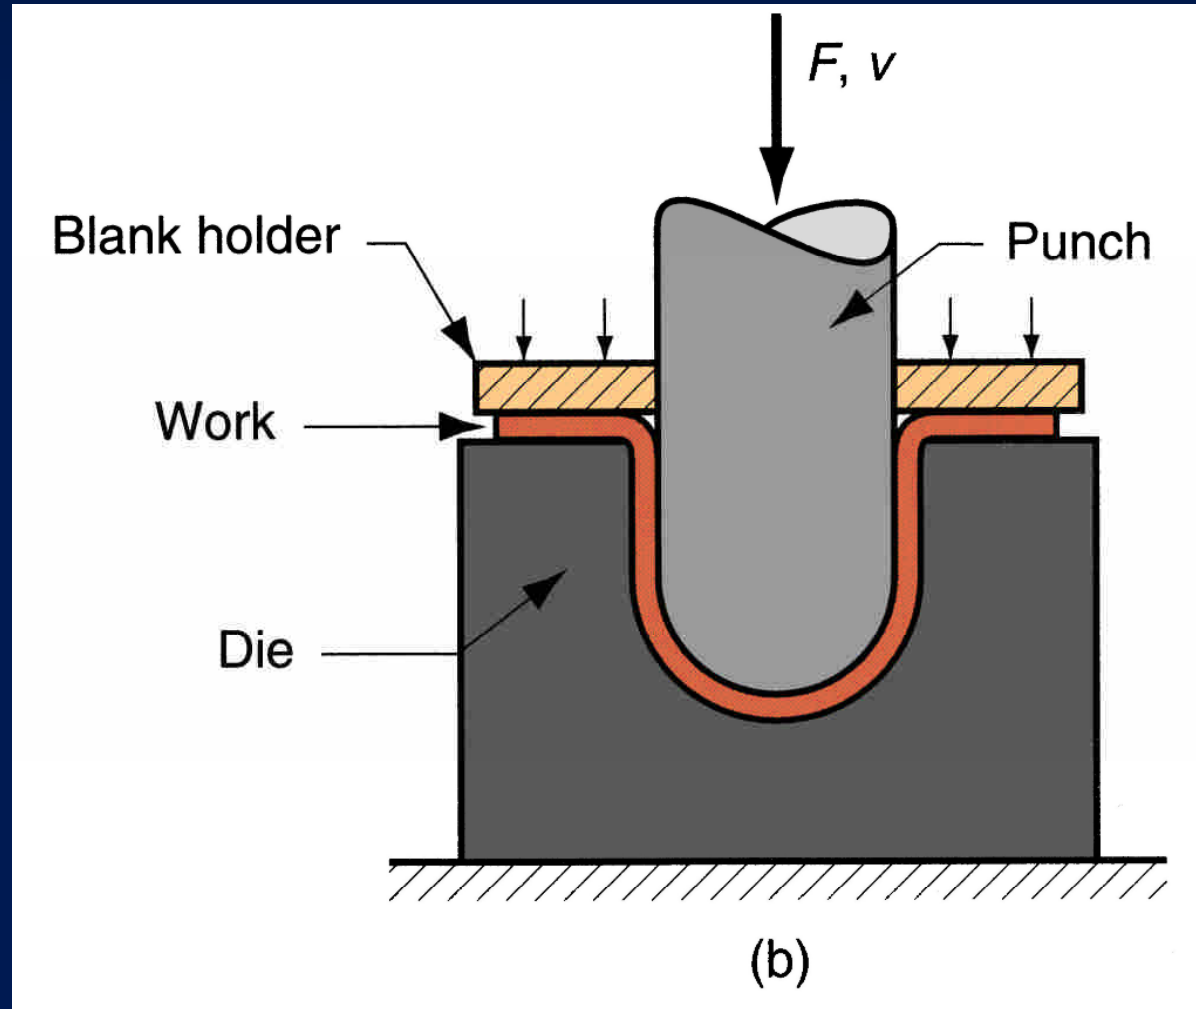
Basic sheet metalworking operations: (b) drawing
